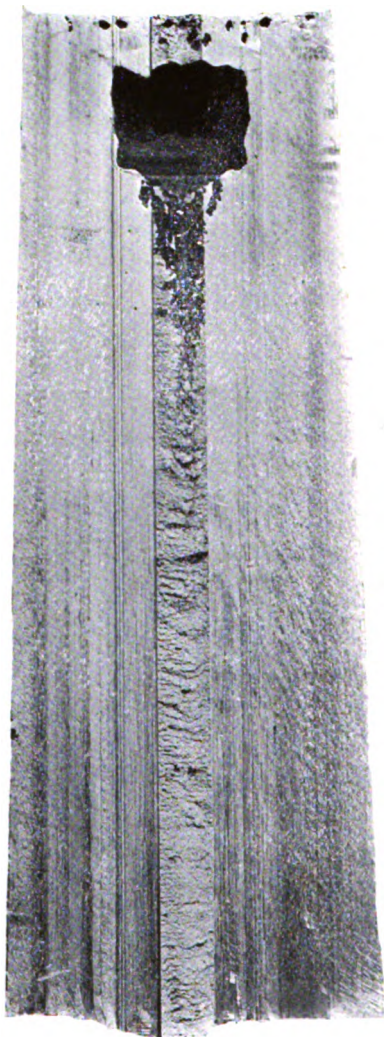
INGOT OF SAME SECTION AS FIG. 1, AND 53.5 IN. LONG, CONTAINING CAVITY OF 250 CUBIC INCHES.
